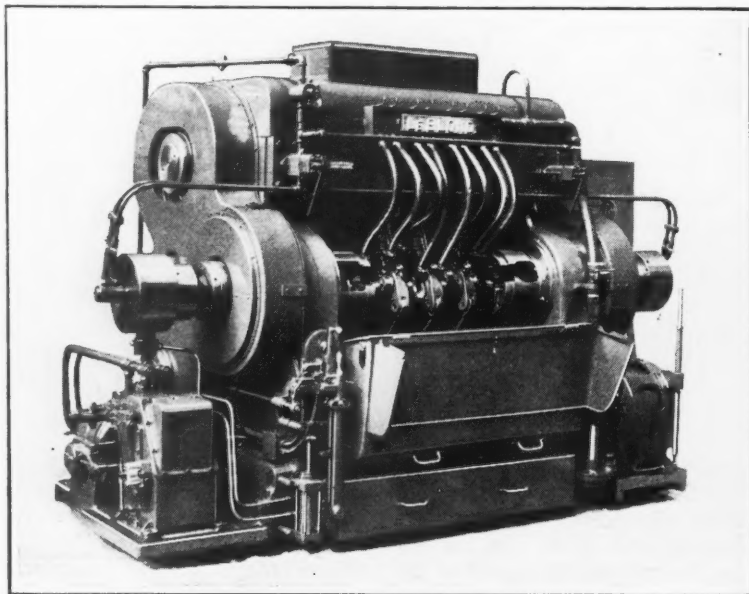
LeBlond Automatic Machine for Finish-turning the Pins of Automobile Crankshafts
